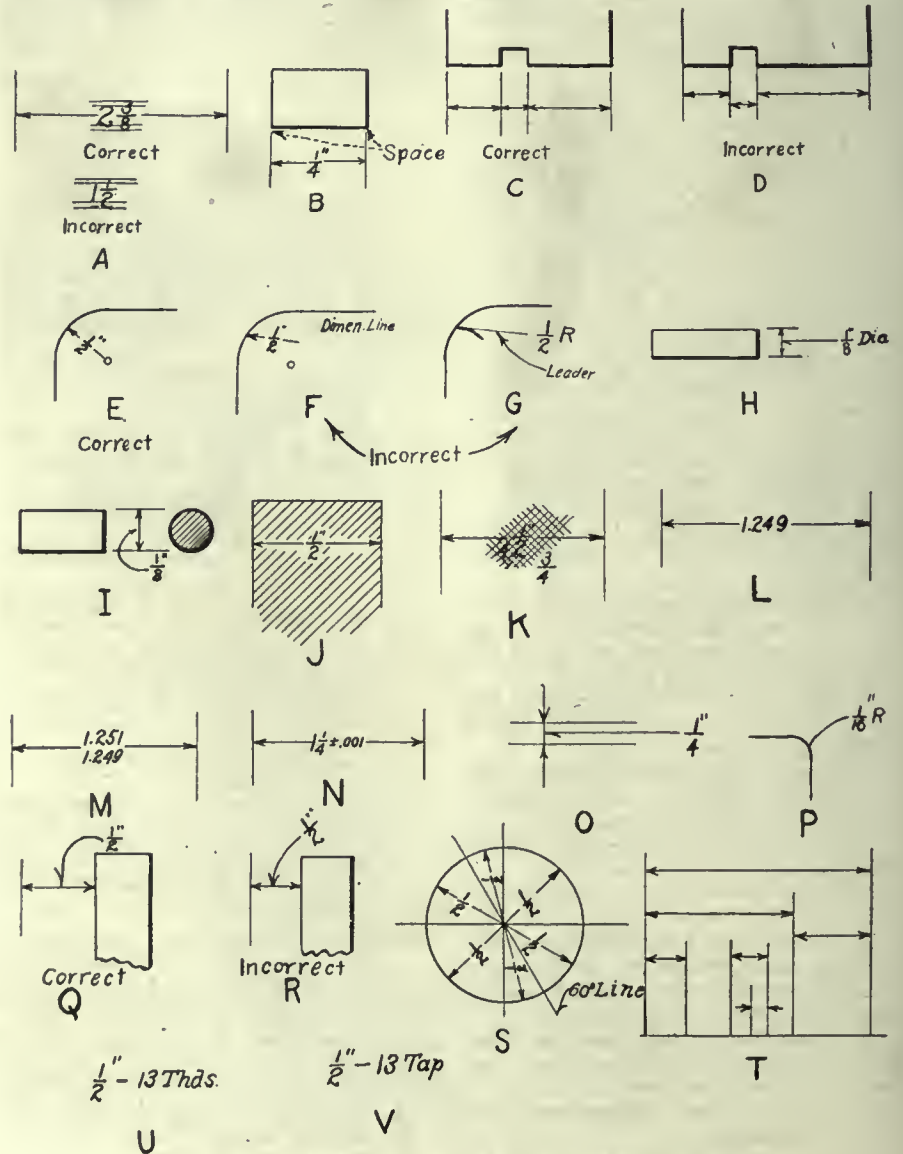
FUNDAMENTALS OF DRAWING DIMENSIONING.
